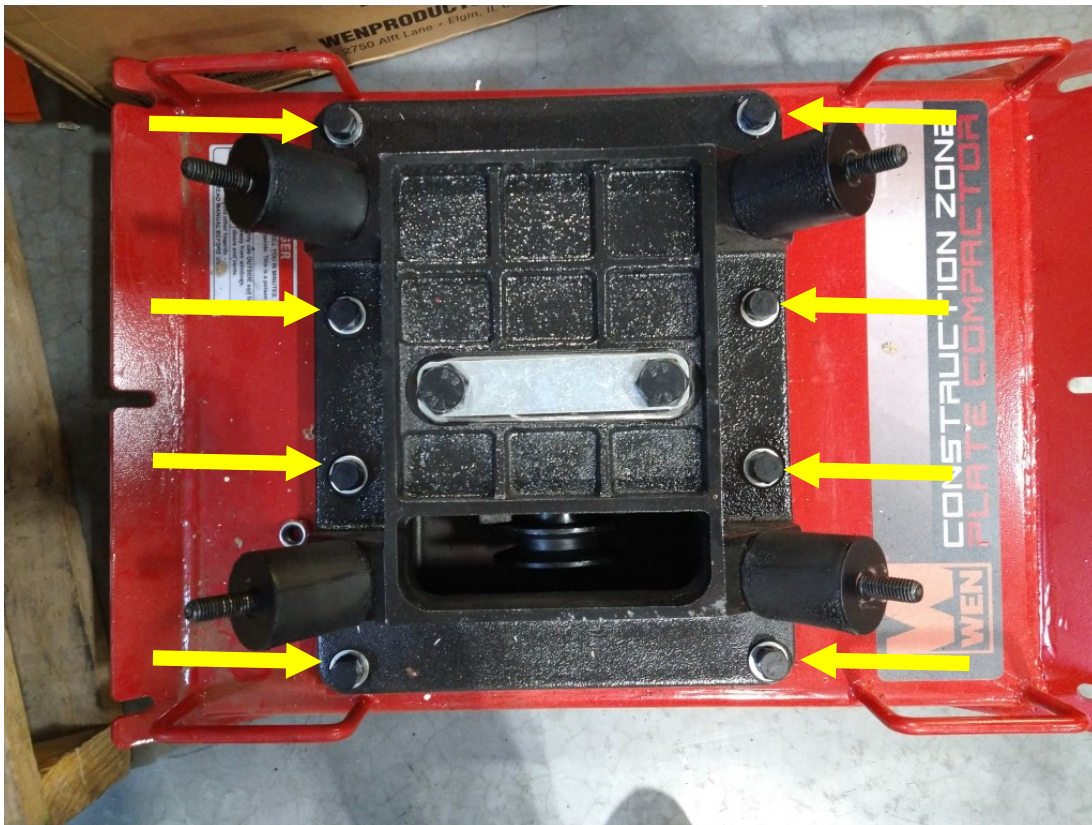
Remove the 8 mounting bolts, then gently remove the exciter seat and vibrating assembly from the bottom plate.
